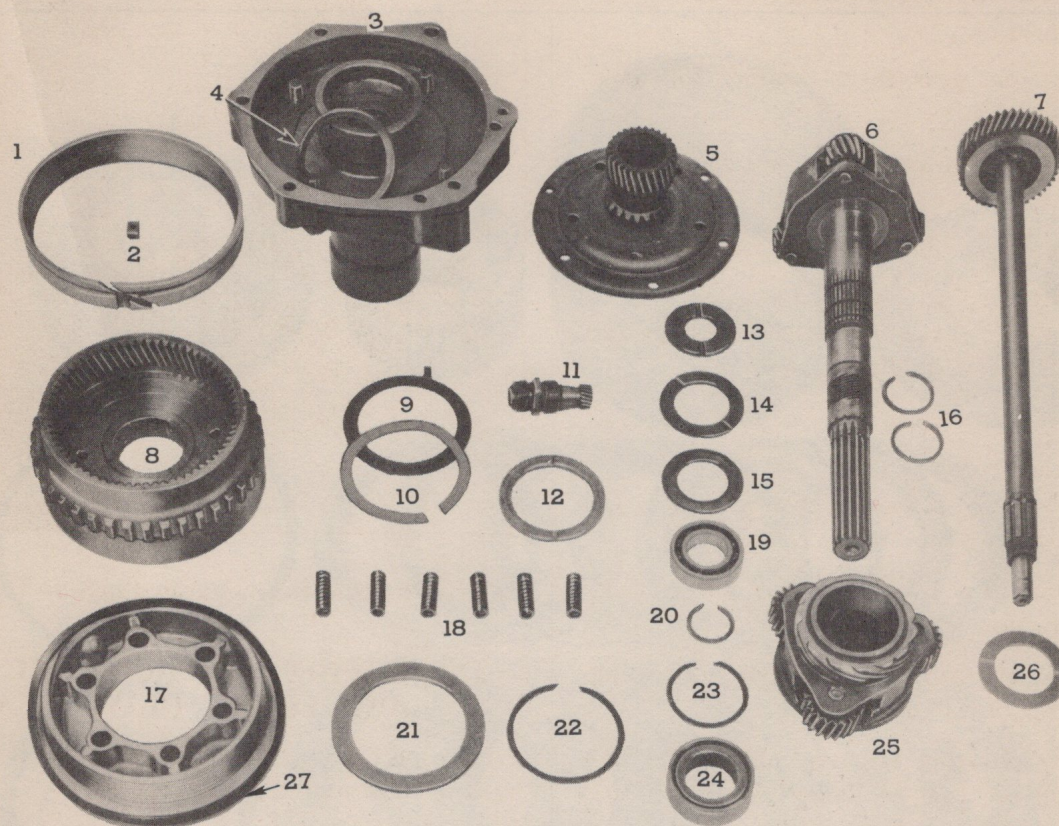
Disassembled View of Reverse Assembly and Rear Bearing Retainer
